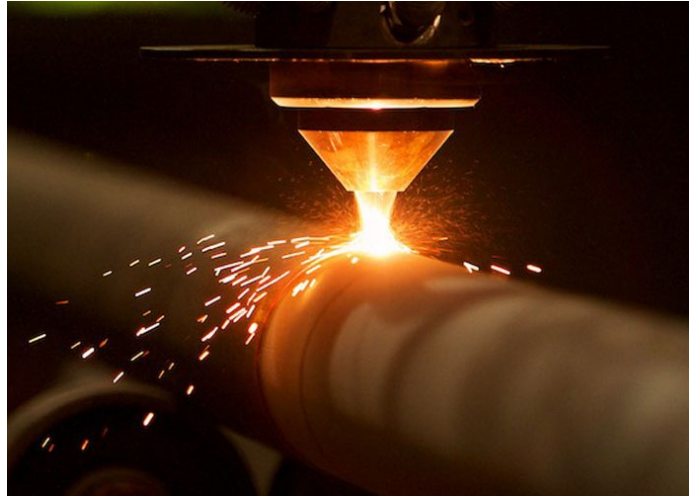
Laser cladding process on a single boiler tube at WherTec workshop
